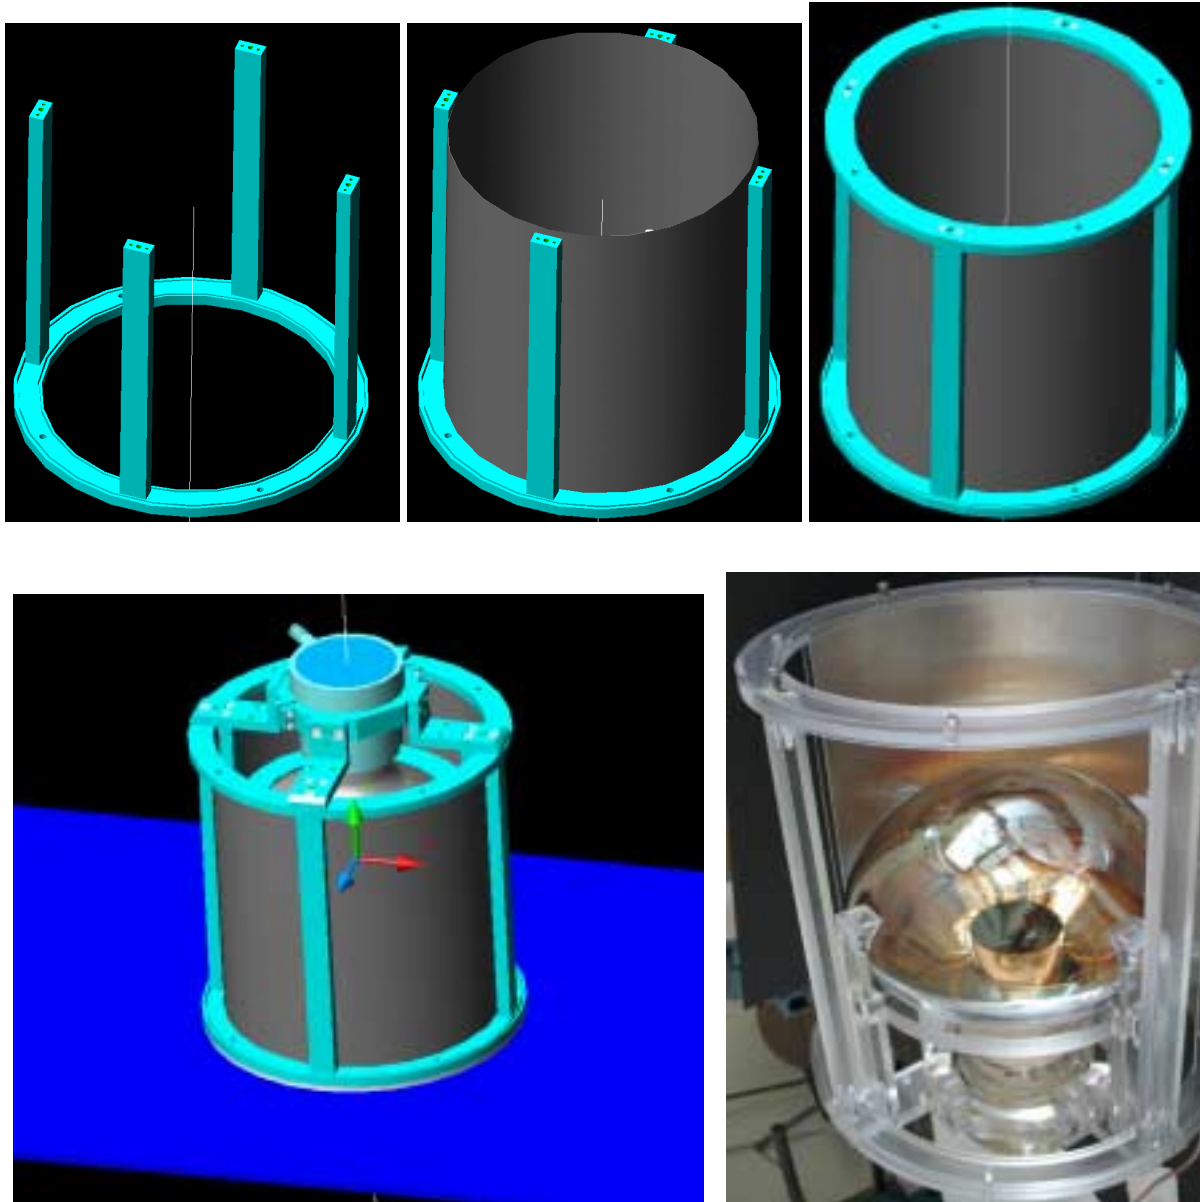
Fig.-25: Sketch showing mu-metal shield attached to the mechanical support and a photo of our prototype
